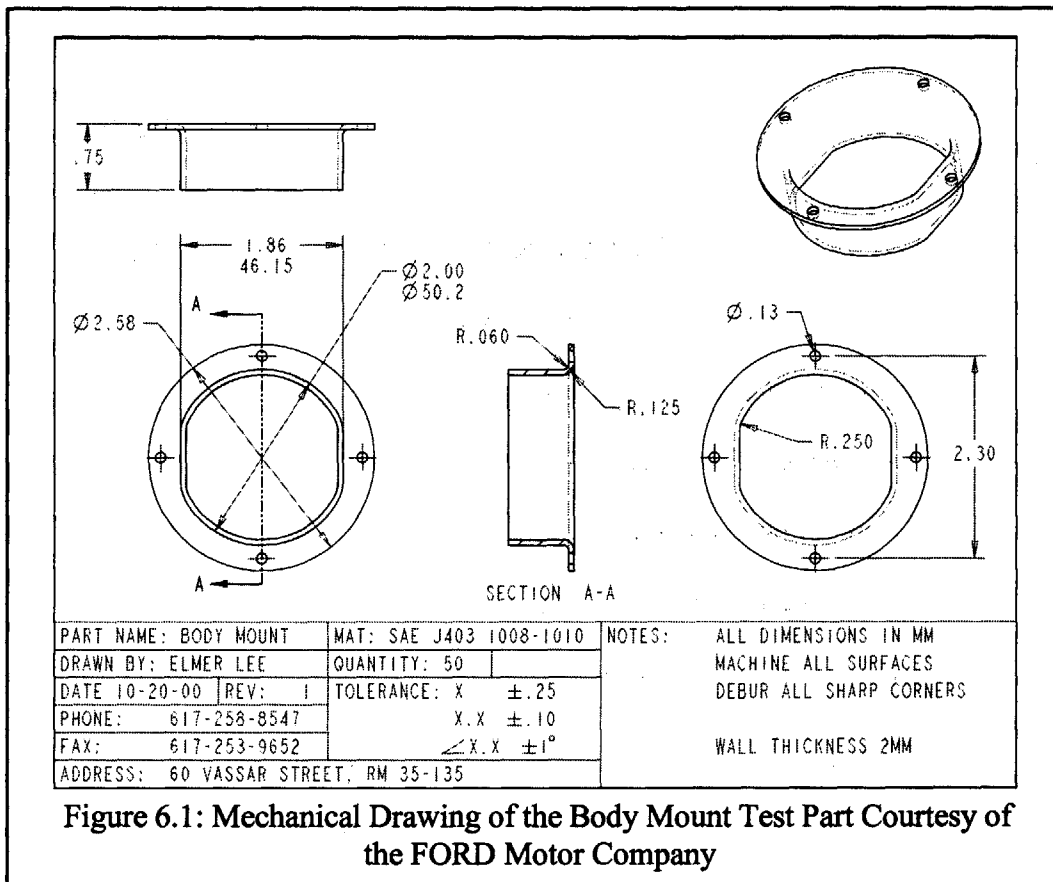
Mechanical Drawing of the Body Mount Test Part Courtesy of the FORD Motor Company
